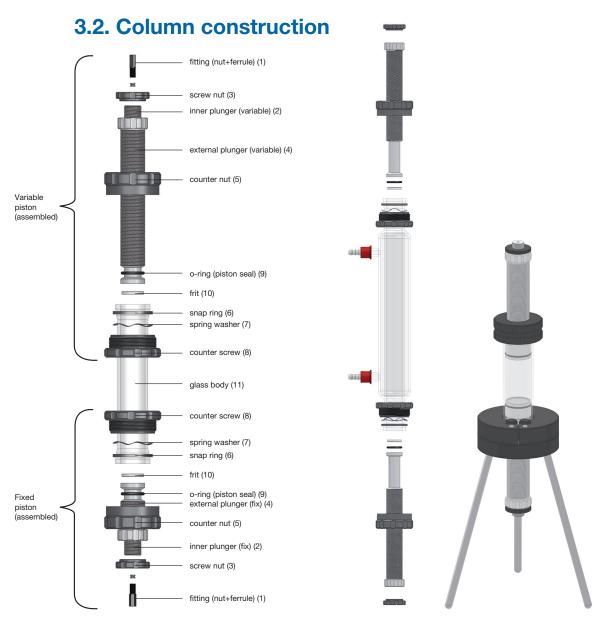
Detail drawing of the ECO column. Left side – Column version without water jacket, centre – Column version with water jacket, right side – 70 and 80 mm column version with tripod.
